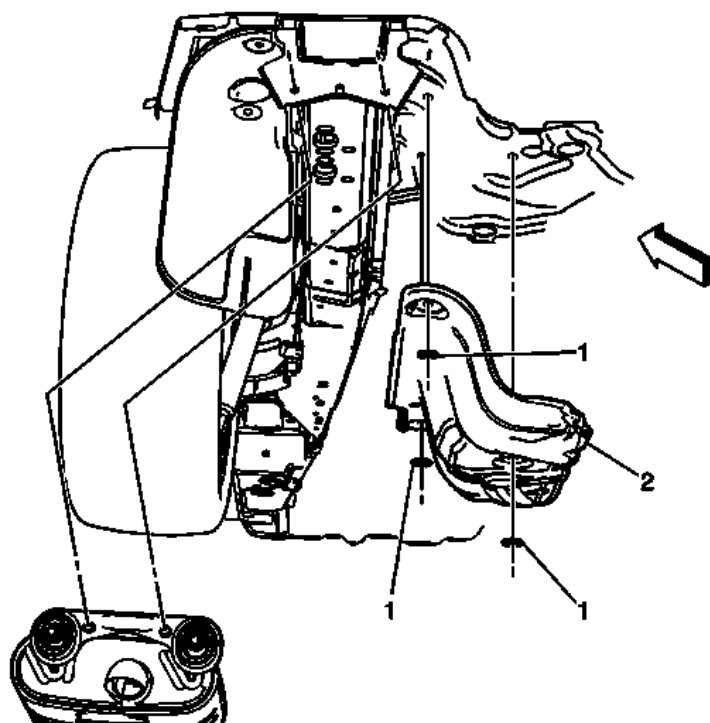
Exhaust Rear Muffler Heat Shield (Left Rear Inner)
